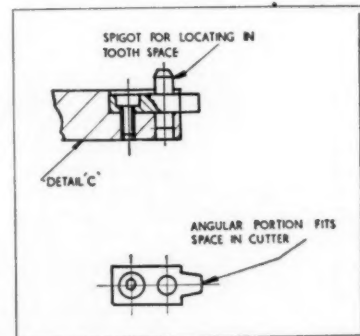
An enlarged view of insert which has a spigot on the base for location in the fixture, and a pin on the upper surface which engages in a tooth space
